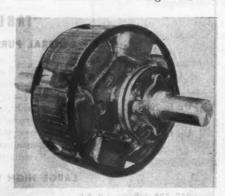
Double-cage winding is shown on a 300 bp., 1200 rpm., synchronous rotor. The motor is used to start and drive a high inertia load such as a line shaft, rubber mill or ball and tube mill drive.
